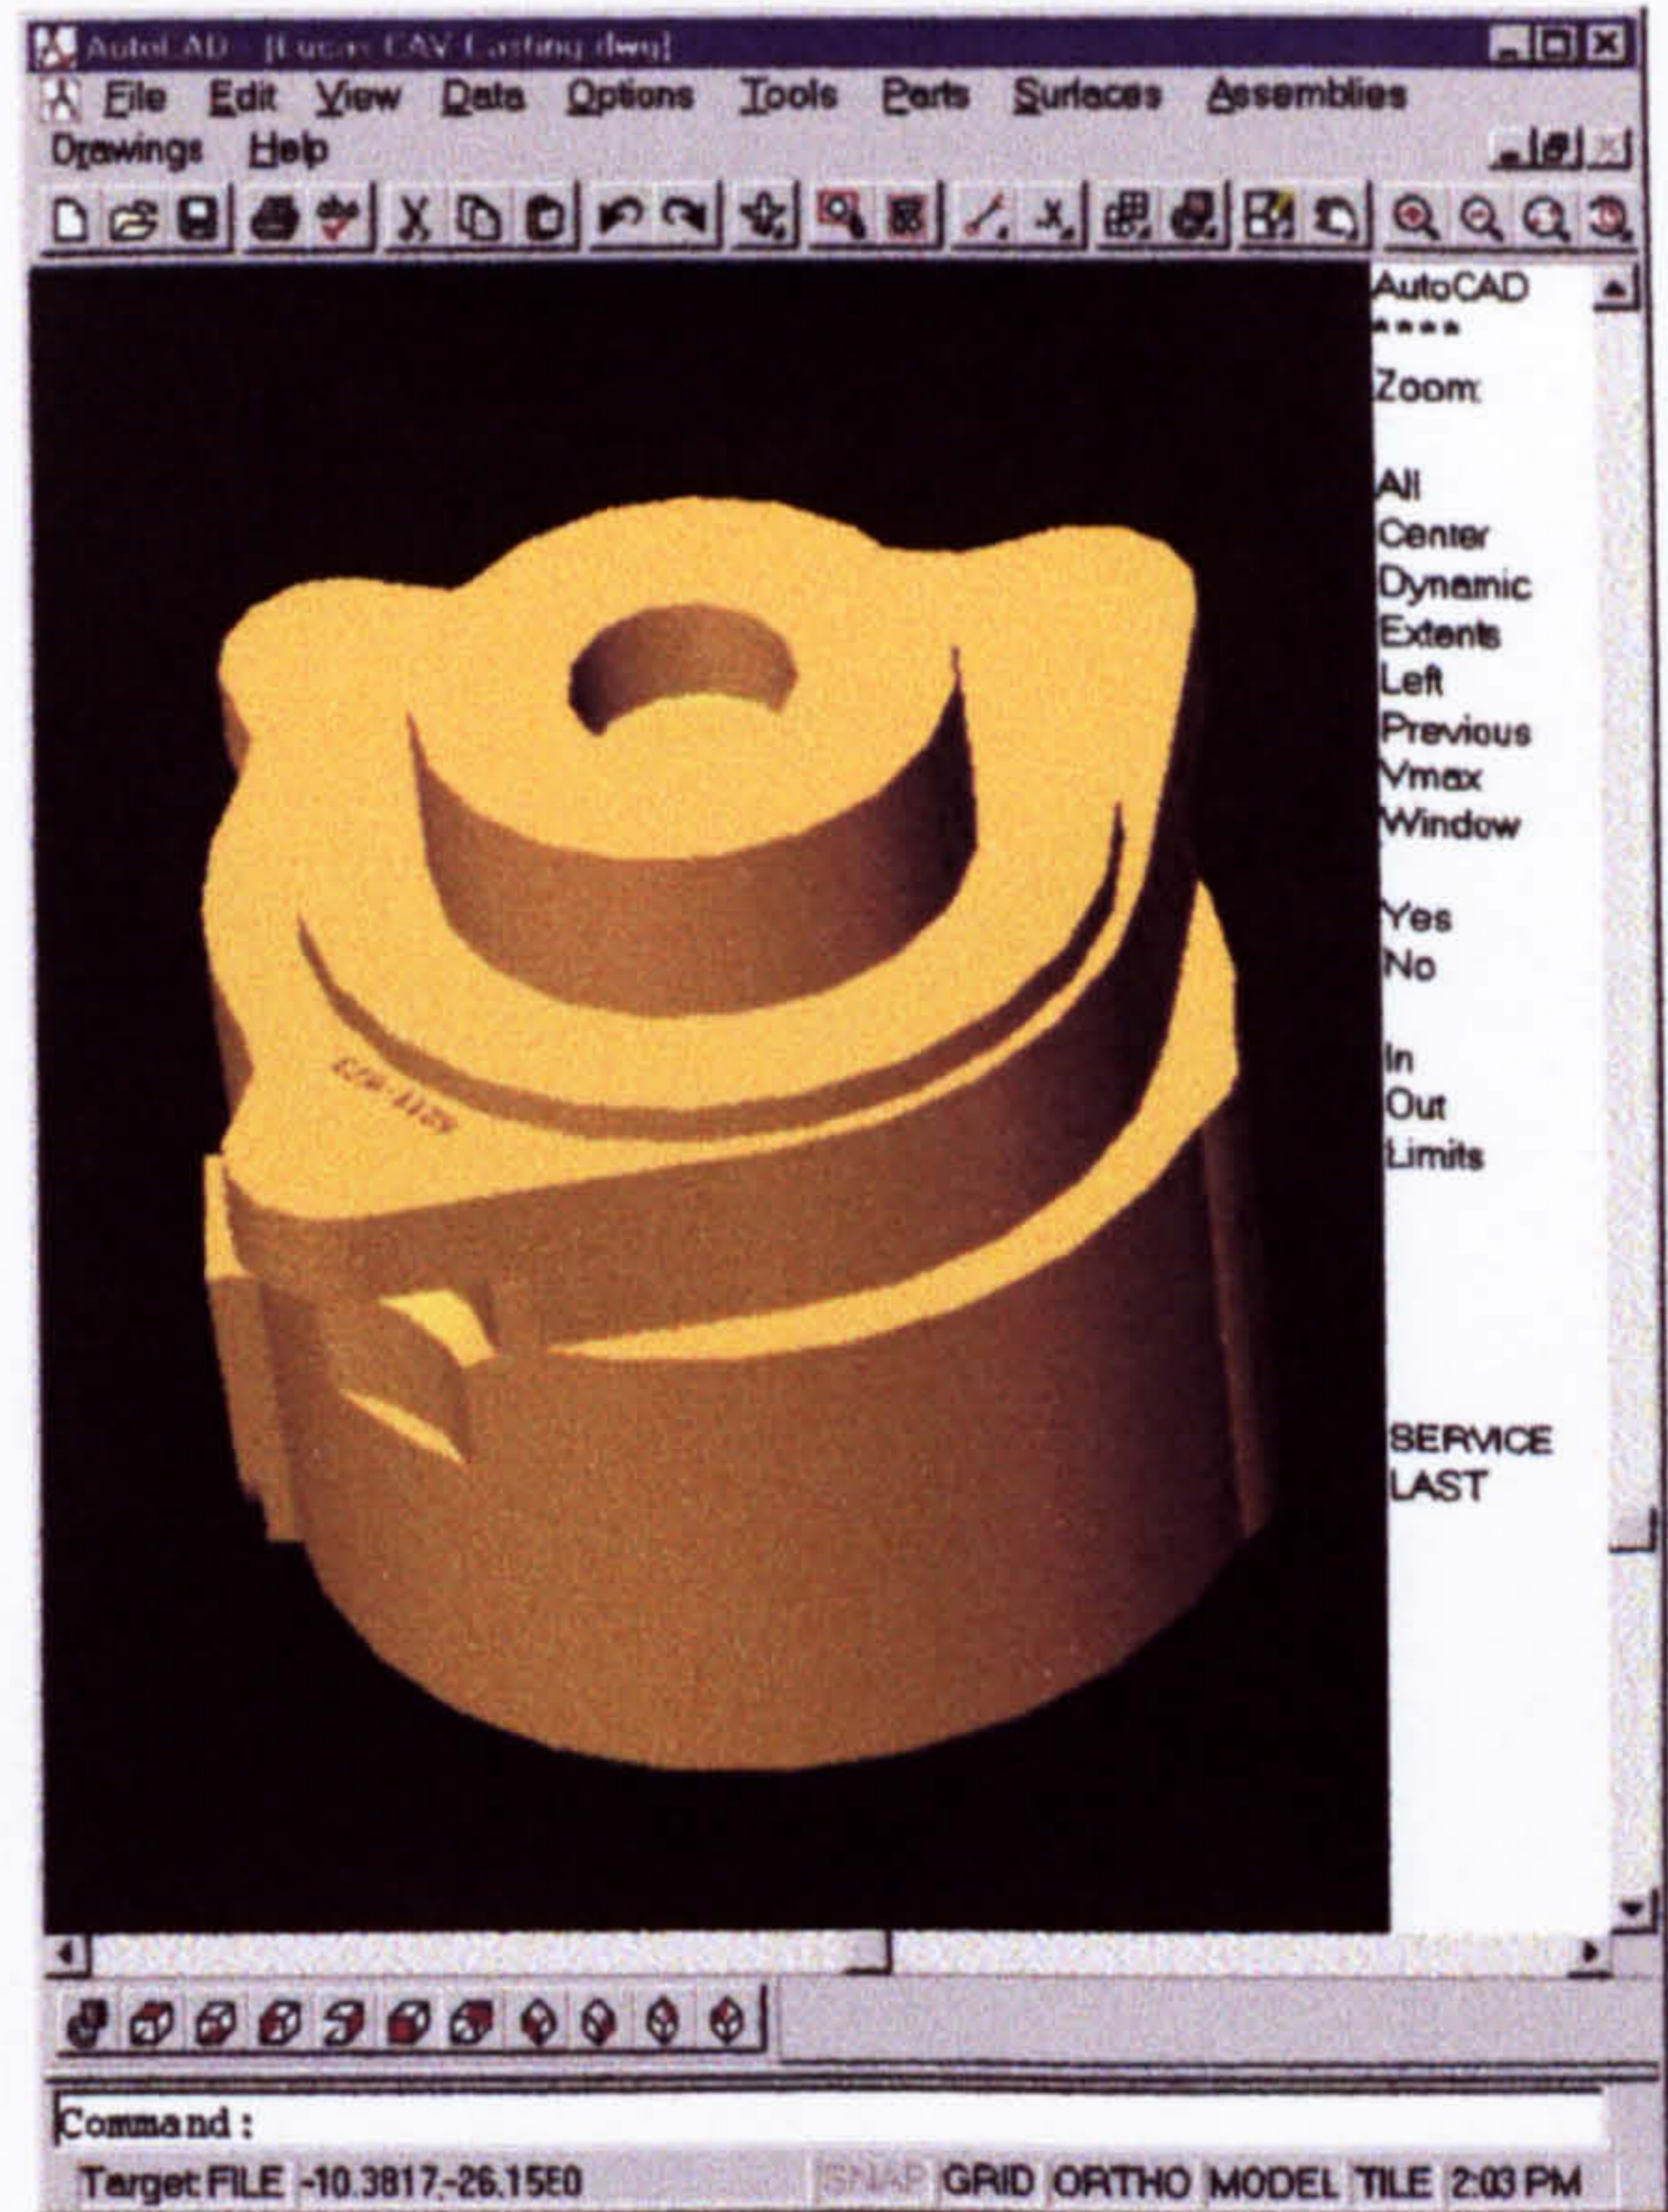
Drive-End-Shield No. V6211-673 - CAD Model & Parameters
